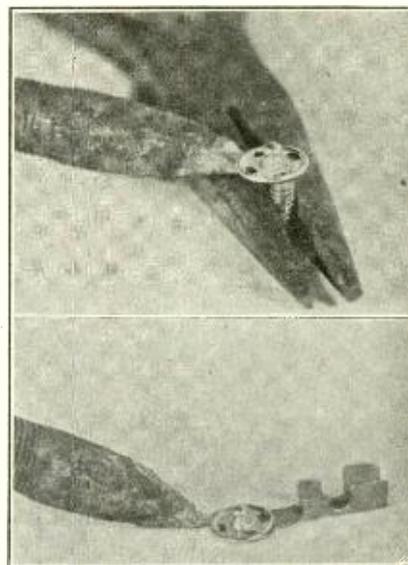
, soldering the screw to the "collar button." Fig. 7, how the lug is soldered to another "collar button."
